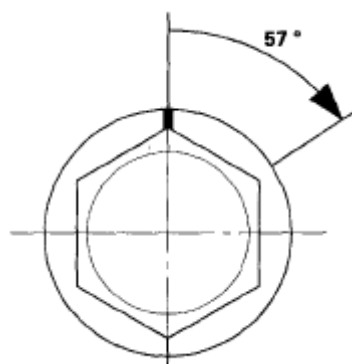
Identifying Bearing Cap Bolts Tightening Angle
